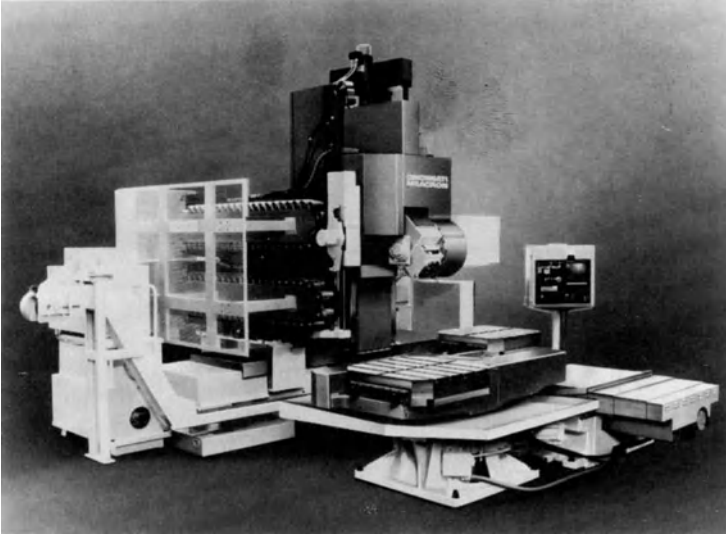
A large 5-axis twin-pallet machining centre. [Courtesy of Cincinnati Milacron.]
